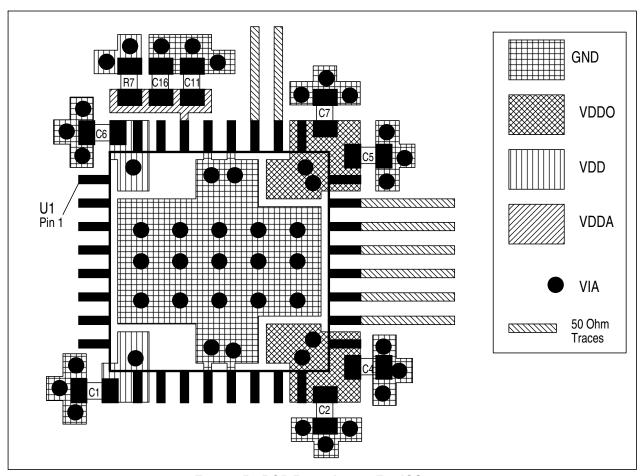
B. PCB BOARD LAYOUT FOR ICS8624
